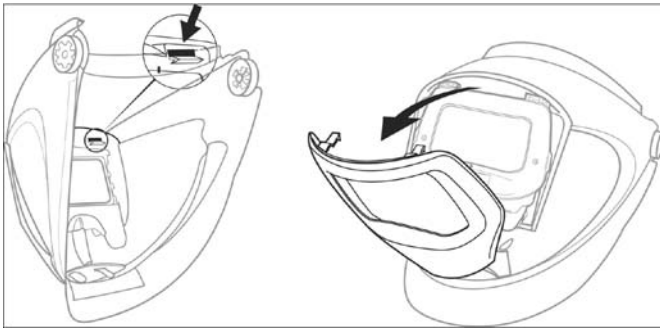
Removing the Front Silver Panel – press up then out on the tab in which the arrow is pointing
